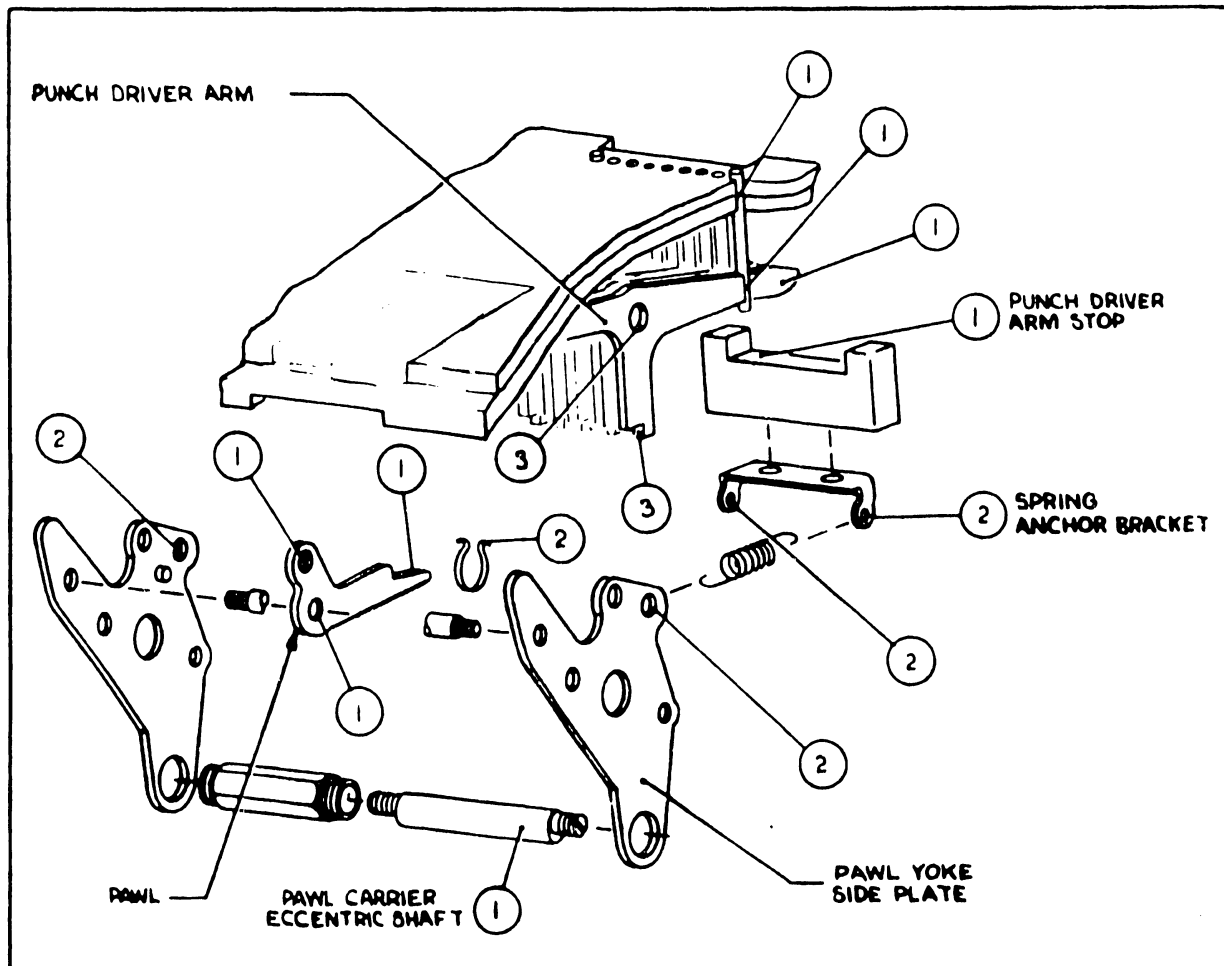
Lubrication Points: Pawl & Punch Assembly
